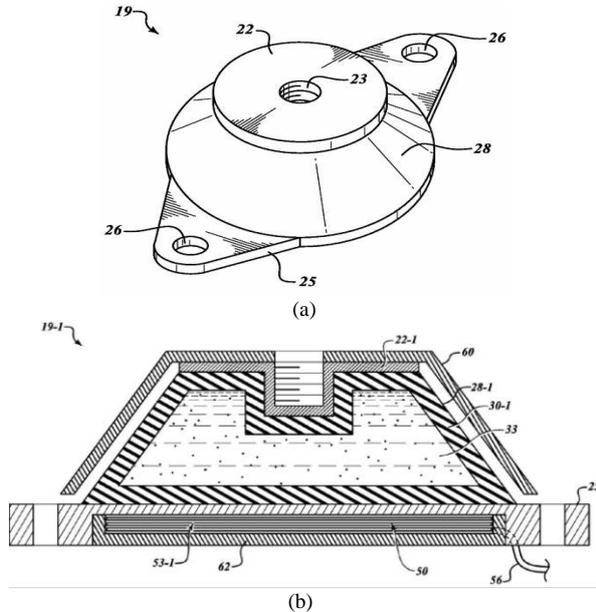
Isometric view (a) and cross sectional view (b) of Anderson's design [21]
